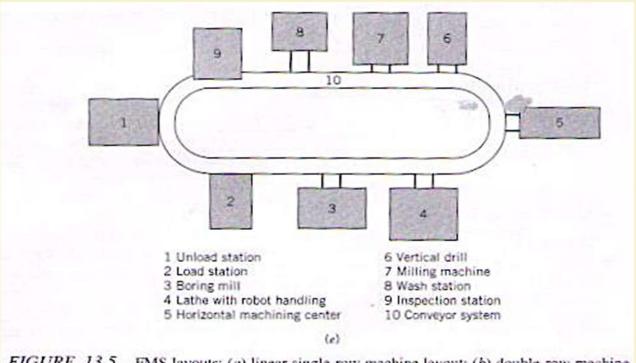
FMS layouts: (a) linear single-row machine layout; (b) double-row machine layout; (c) circular machine layout; (d) cluster machine layout; (e) loop machine layout.
